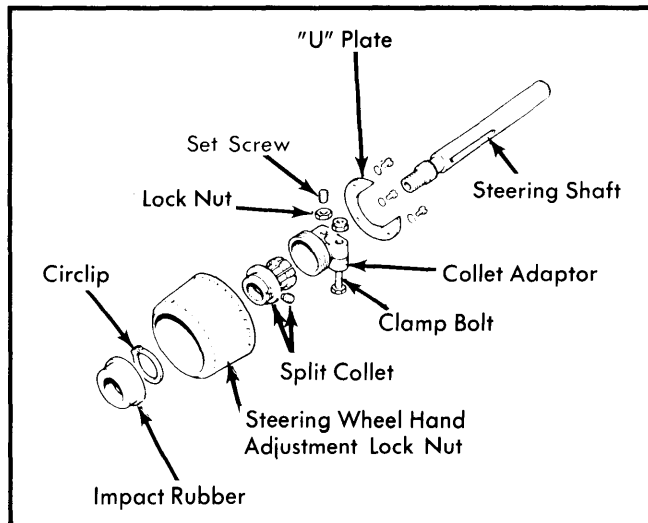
Components Located Behind Steering Wheel XJ6 and XJ12 Models
